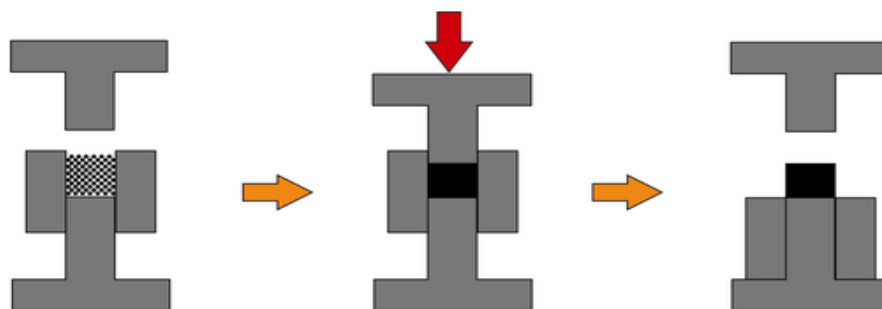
A schematic view of uniaxial pressing cycle [26].
